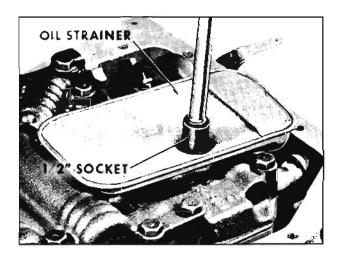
Removing Oil Strainer Attaching Bolt
